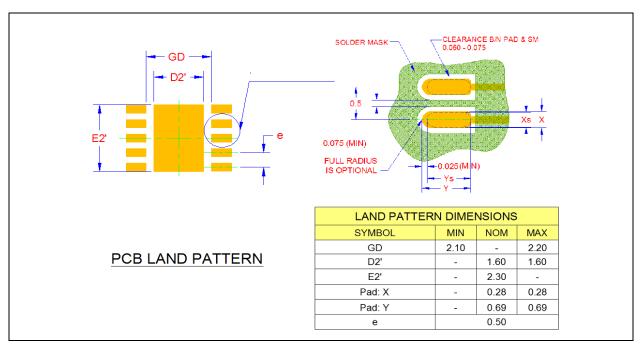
10-Pin DFN 3mm x 3mm PCB Footprint
